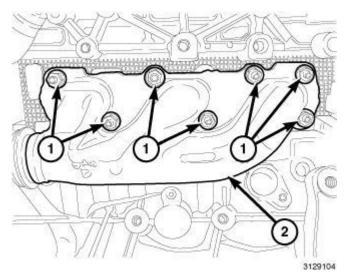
Right Exhaust Manifold & Nuts Courtesy of CHRYSLER GROUP, LLC
